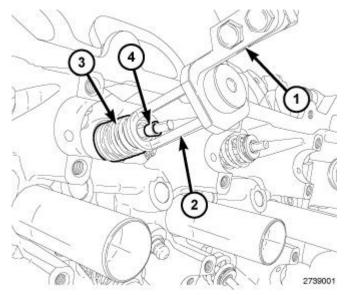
Compressing Valve Spring & Locating Valve Retaining Locks Courtesy of CHRYSLER GROUP, LLC
